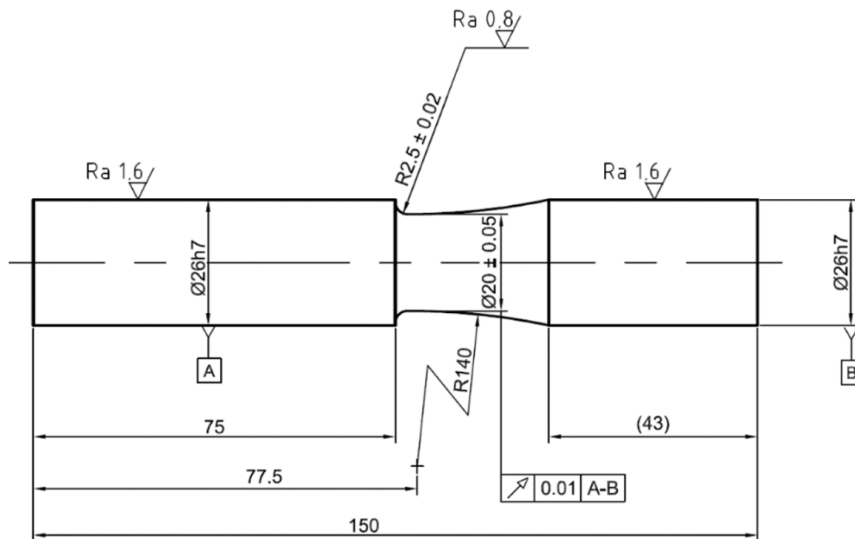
Specimen with fillet. A and B in frames indicate surfaces based on which a datum axis for geometrical run-out tolerance is defined.
